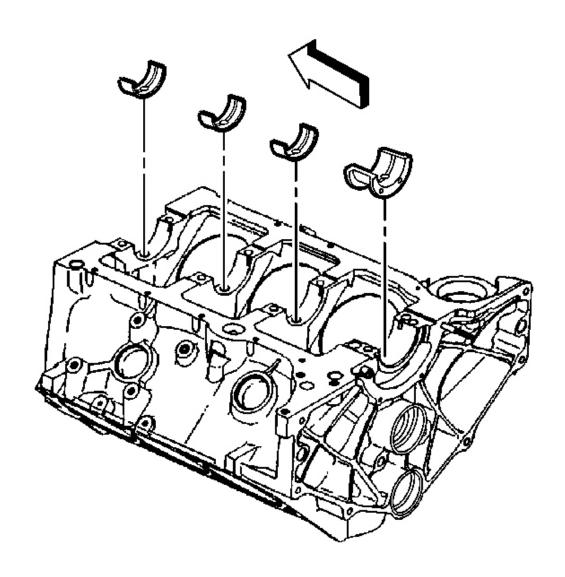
View Of Crankshaft Bearings At Engine Block Courtesy of GENERAL MOTORS CORP.
